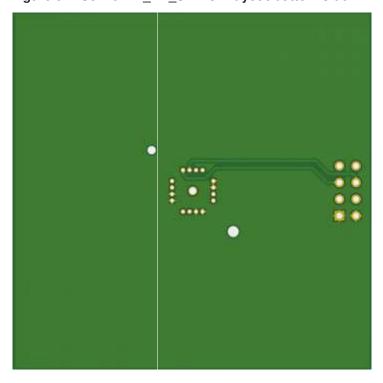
AS5270-MF_EK_SB PCB layout bottom side
